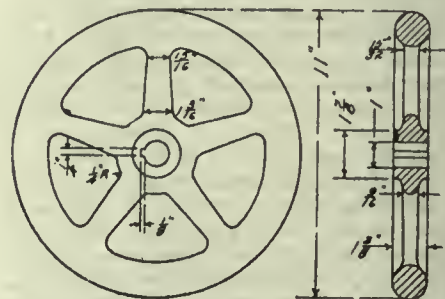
WORKING DRAWING OF HAND WHEEL.
